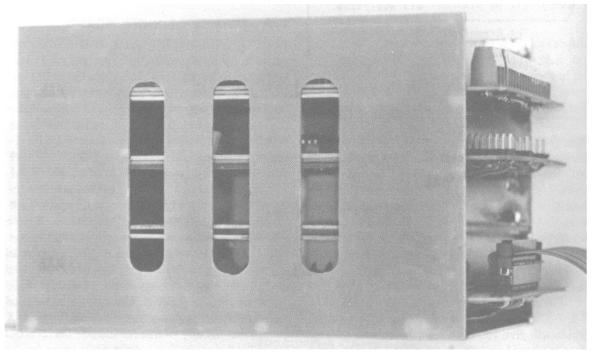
Side-view of the card-cage assembly. The decoder board is plugged into the bottom slot, the 110board is plugged into one of the middle slots, and the AID board is plugged into the top slot. When you are inserting the circuit cards into the plug-in slots, you must use a little care so you will not break any connecting wires on the bottom of the board that is in the slot above.
